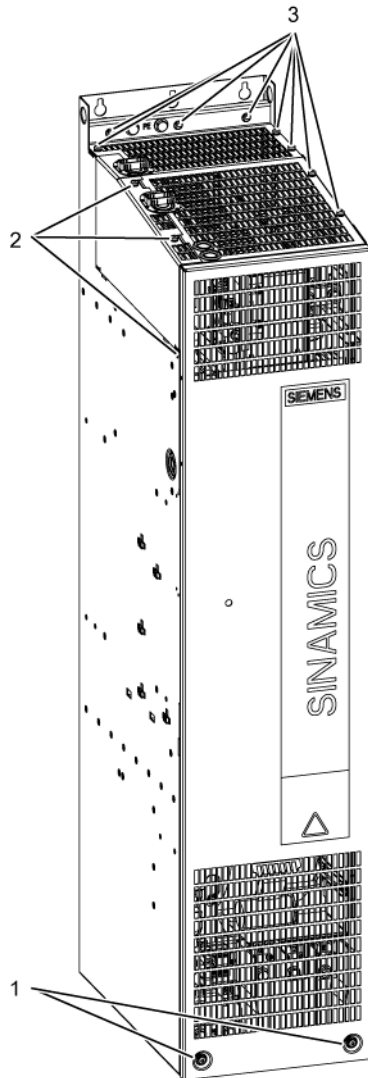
Installing the Braking Module in a Smart Line Module / Active Line Module / Motor Module, frame size GX – steps 1 - 3
